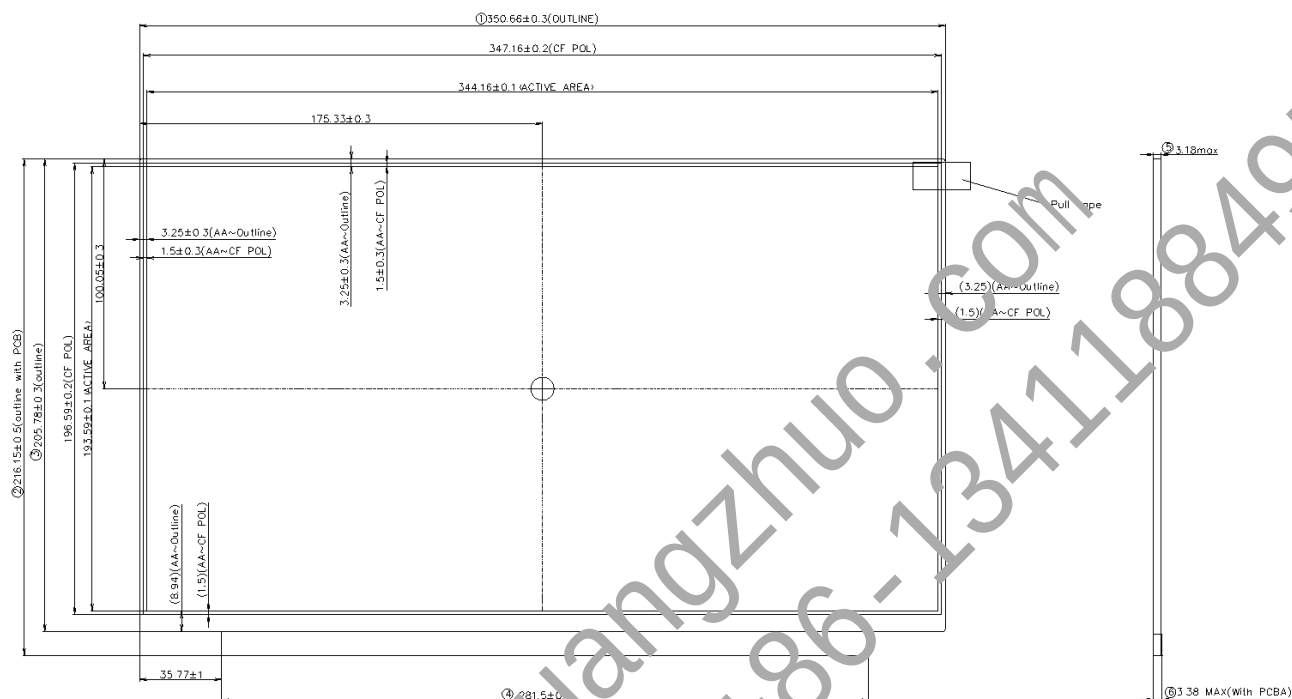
TFT-LCD Module Outline Dimension (Front View)
